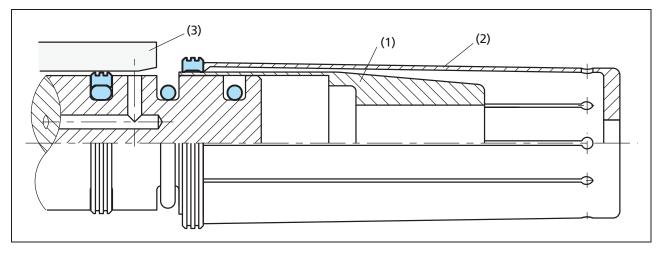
Expanding the Turcon[®] Roto Glyd Ring[®] over the installation sleeve using an expanding sleeve
